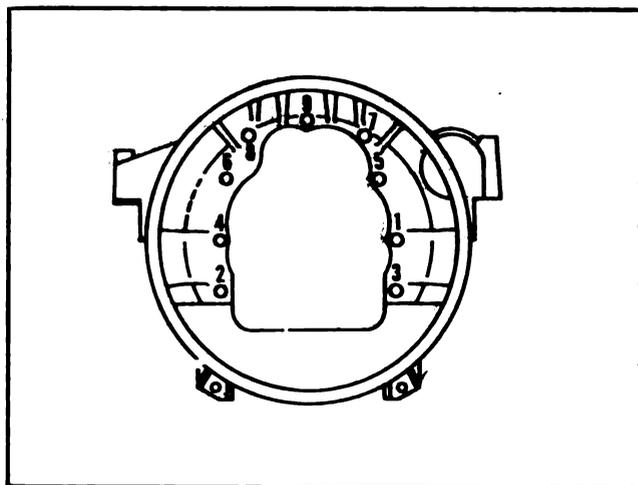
Tightening Sequence For The Flywheel Housing Capscrews.
